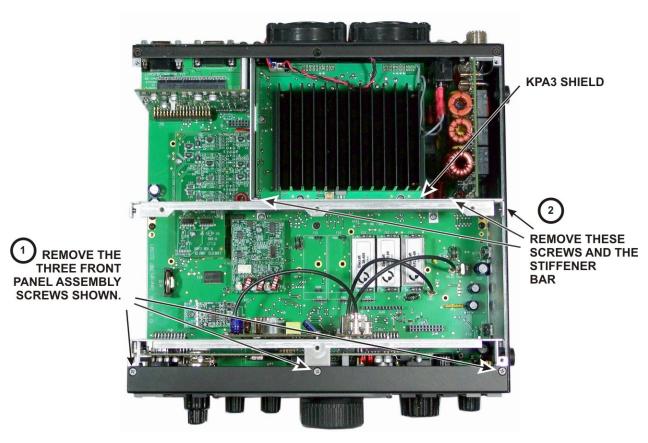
Removing Front Panel Mounting Screws and Stiffener Bar.
